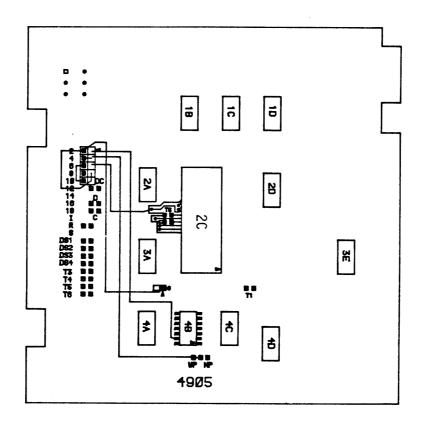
Wire harness and plug location for Revised Shugart Drive used in a 4905.
